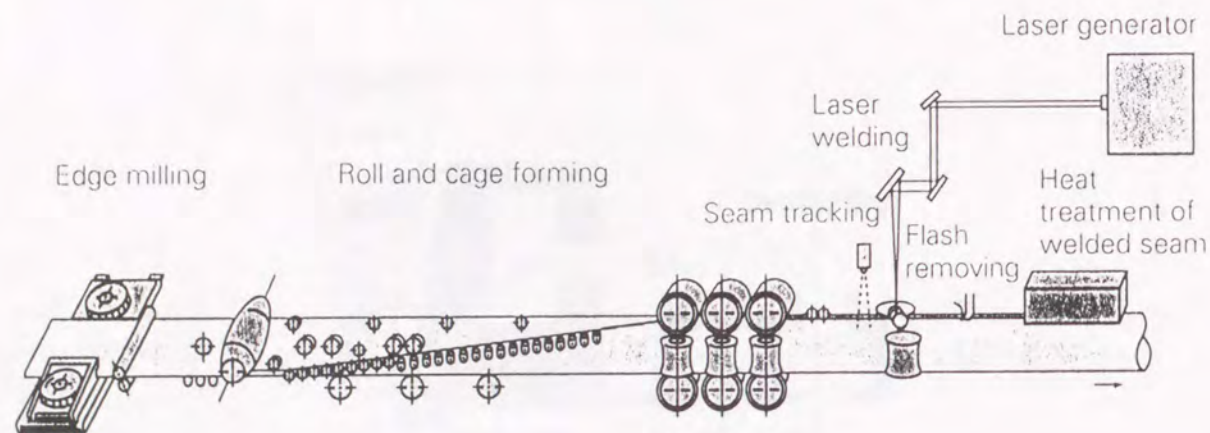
Schematic diagram of 25 kW laser welding process
